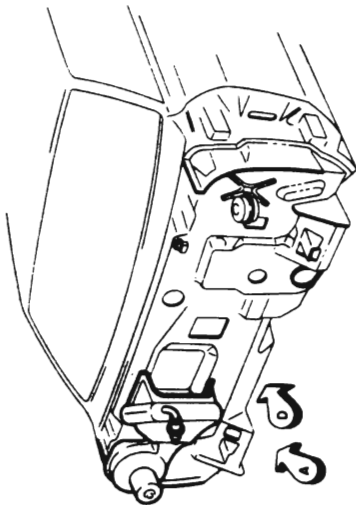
Air Conditioner-Heater Assembly, and Evaporator Assembly, 45-46-48000 Series
